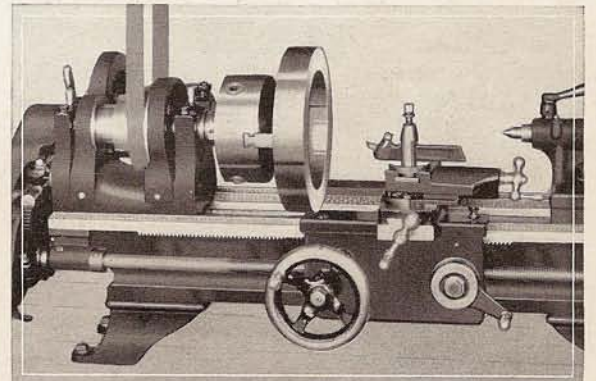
Chucking Capacity of No. 22—9-inch Junior Lathe Machining Work  $9\frac{1}{4}$  inches in diameter
